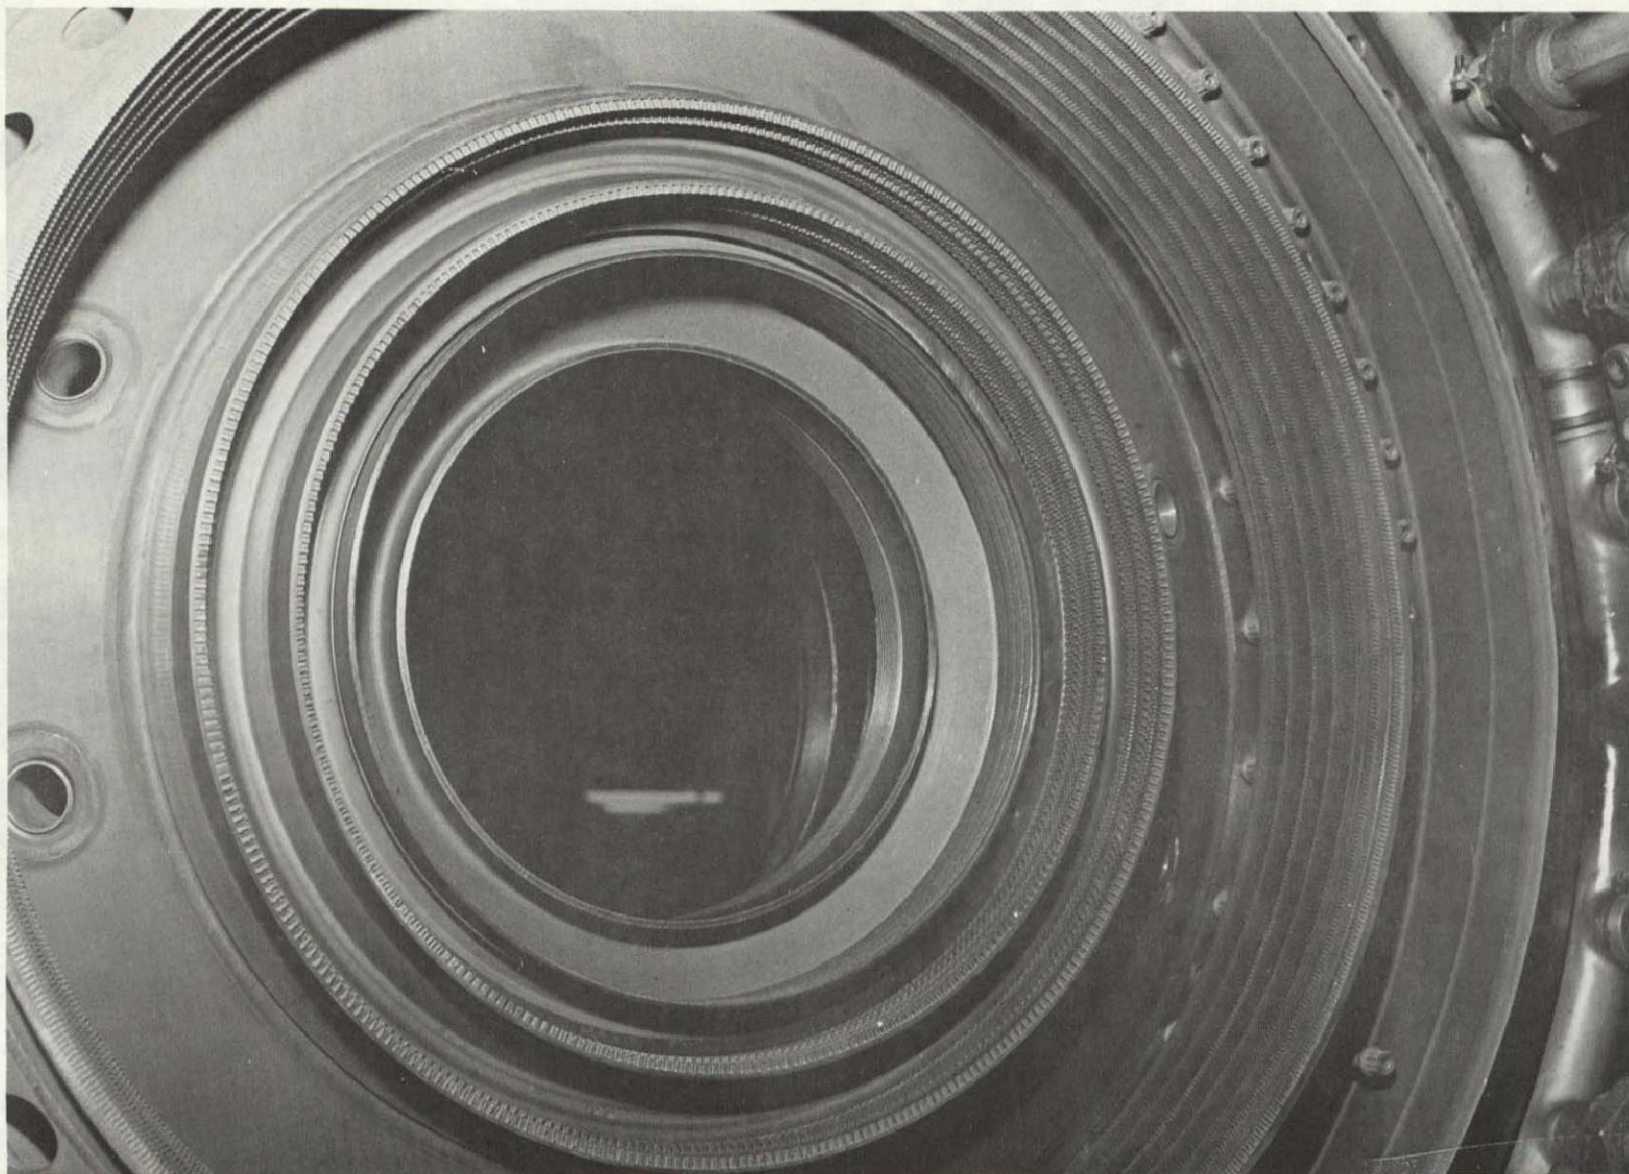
Compressor Rear Frame, Forward Seals - Overall View, Installed.
